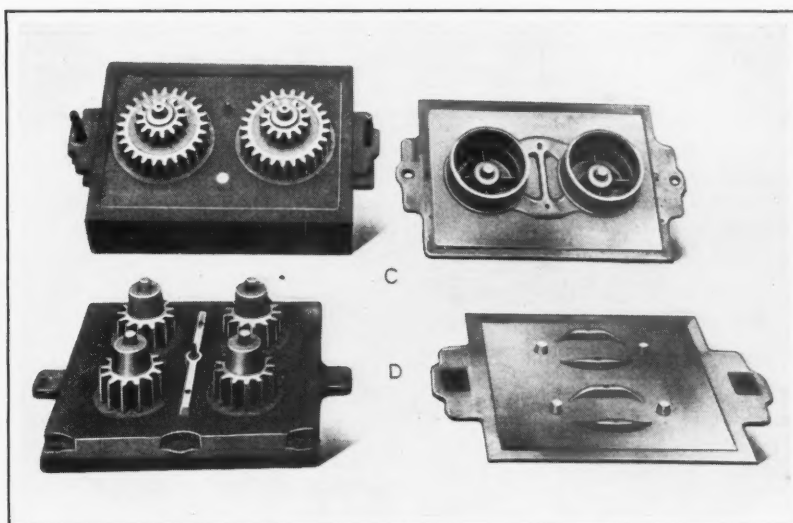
Two More Metal Pattern Sets for making Gear Molds
